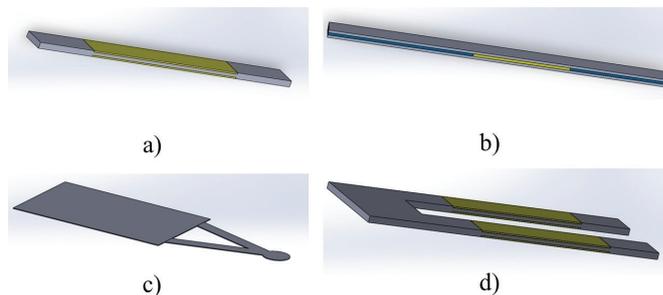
Different cantilever designs: a) Simple cantilever; b) Sandwich cantilever; c) Triangular cantilever; d) C-beam cantilever
